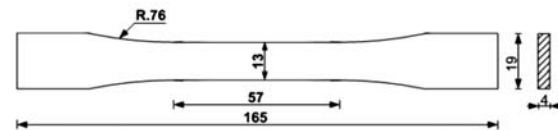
Dimension glass piece for tensile specimen following ASTM D-638 M geometry.
